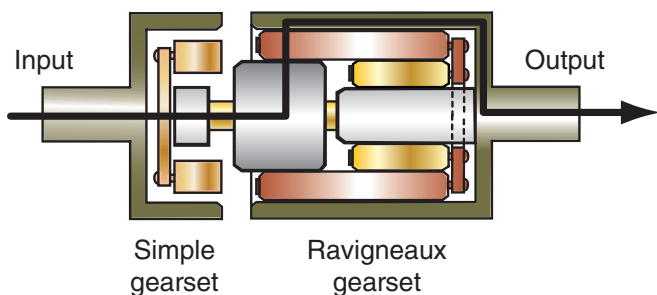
Power flow in first gear for a typical Lepelletier gearset.
